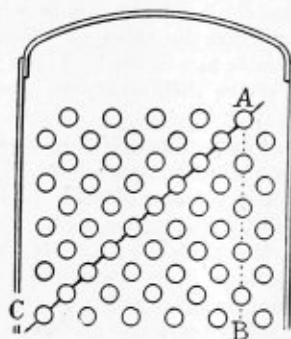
ILLUSTRATING A CYLINDRICAL SHELL PERFORATED WITH TUBE-HOLES.
